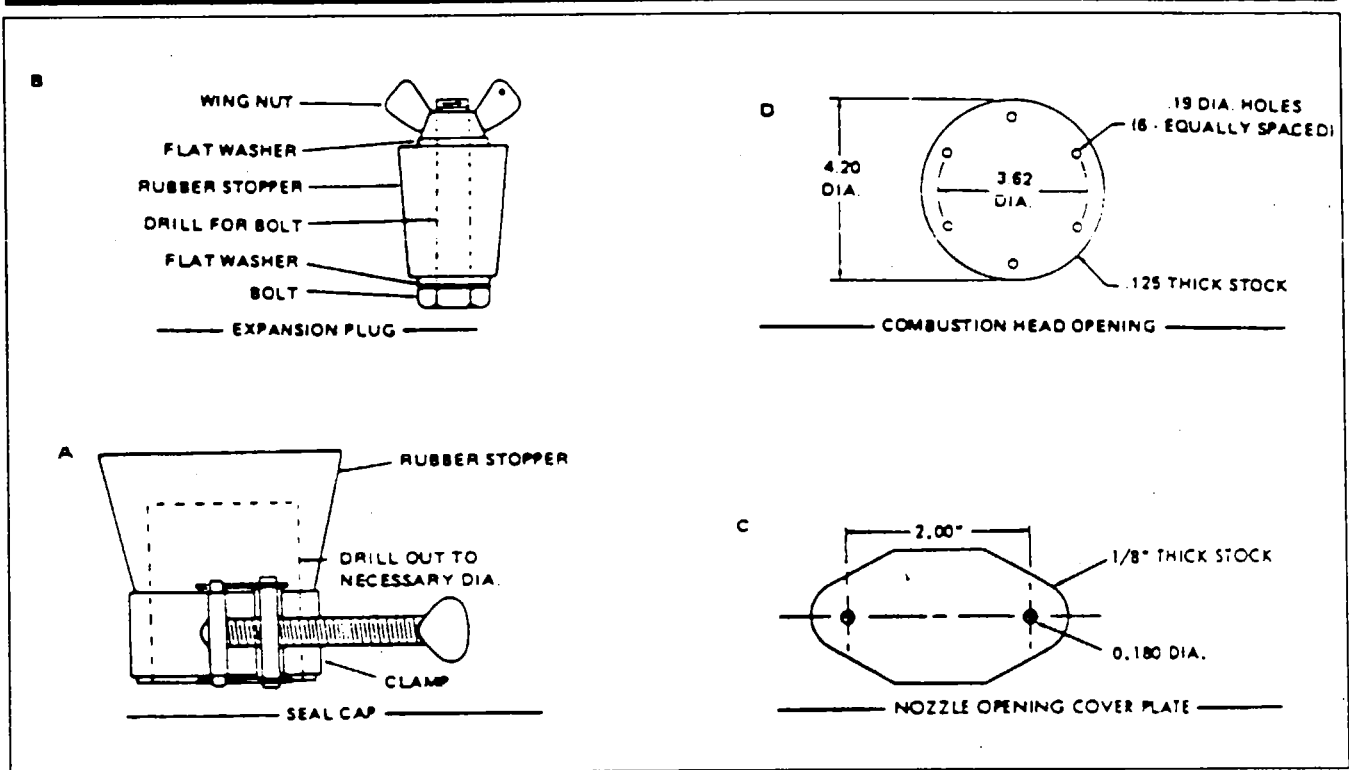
Suggested Design for Seal Plate, Plugs and Caps for Combustion Tube Leakage Test
